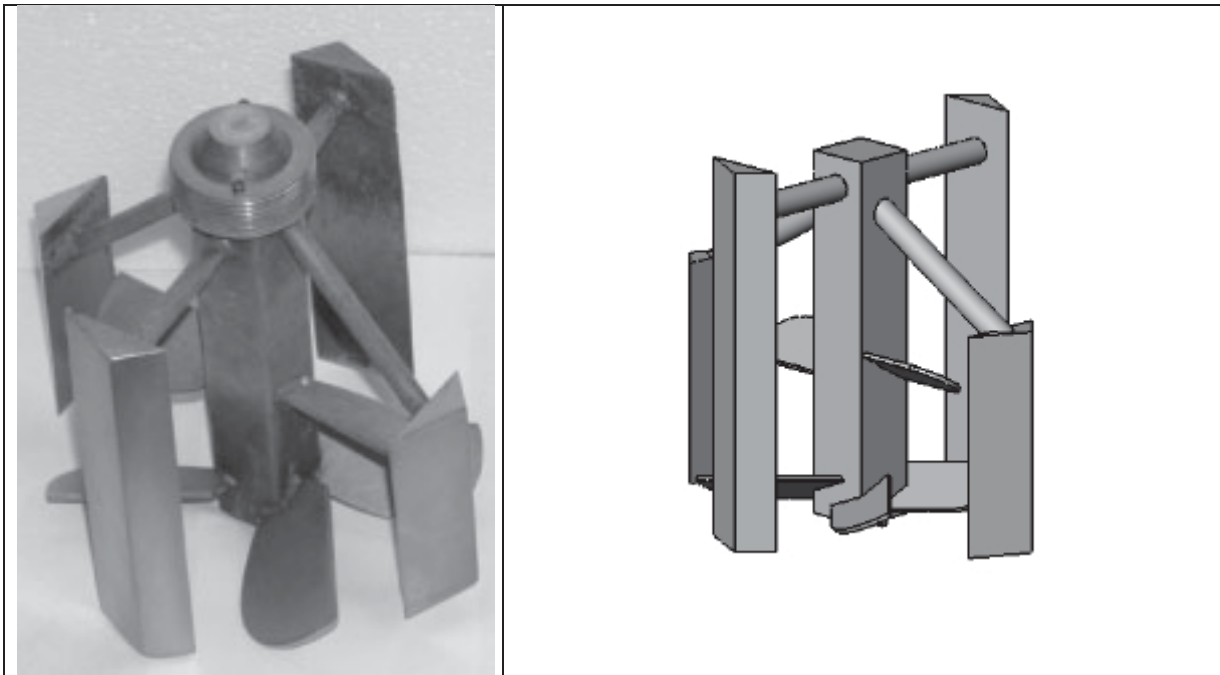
Impeller for mixing and measuring mortar and paste
